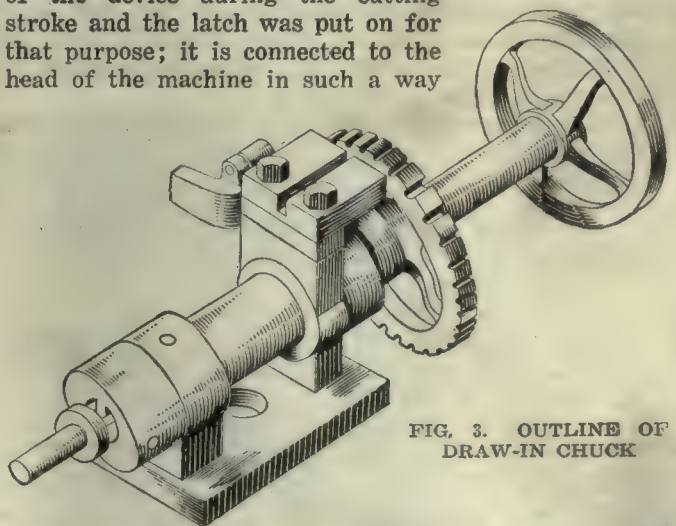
OUTLINE OF DRAW-IN CHUCK
